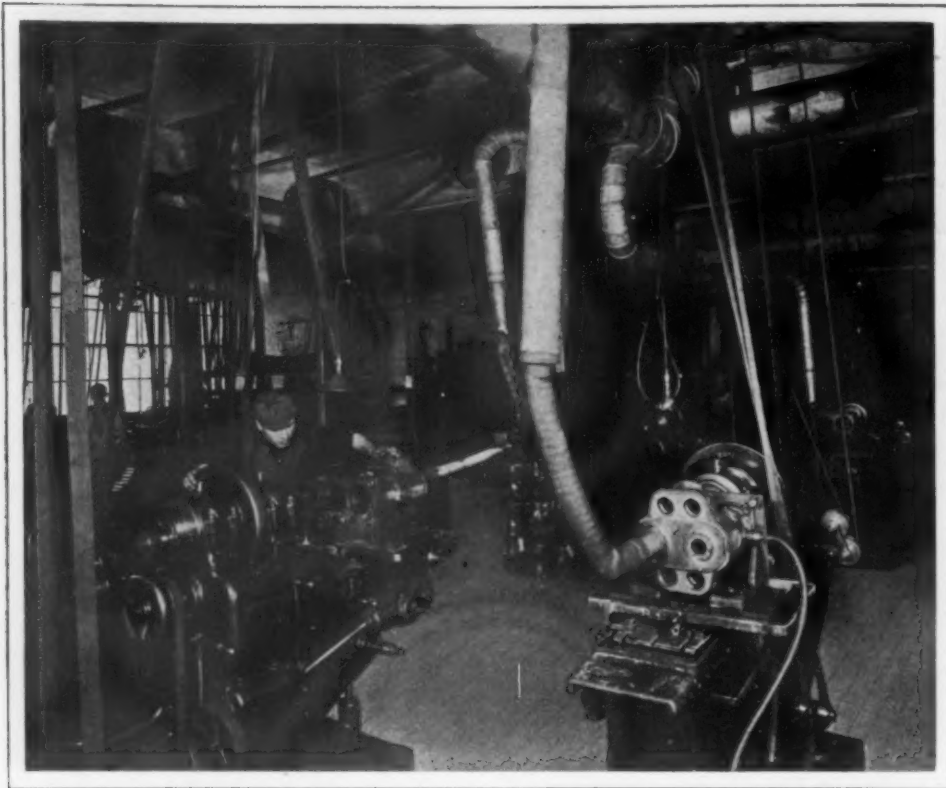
Showing the Exhauster Arrangement Provided for the Cylinder Grinding Operation
